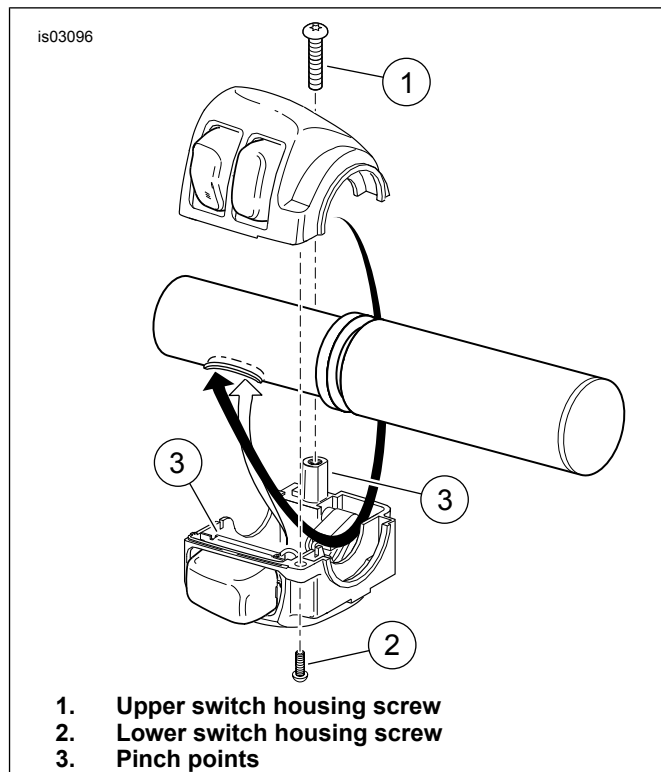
Switch Housing Wire Routing (Right Side Housing Shown)
